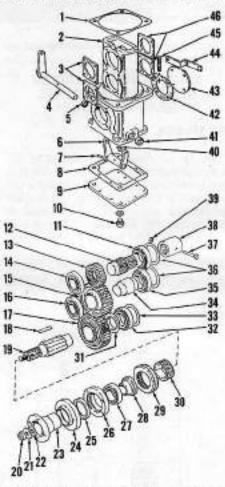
Exploded view of transfer gear box used with David Brown front drive axie showing component parts and their relative positions.
